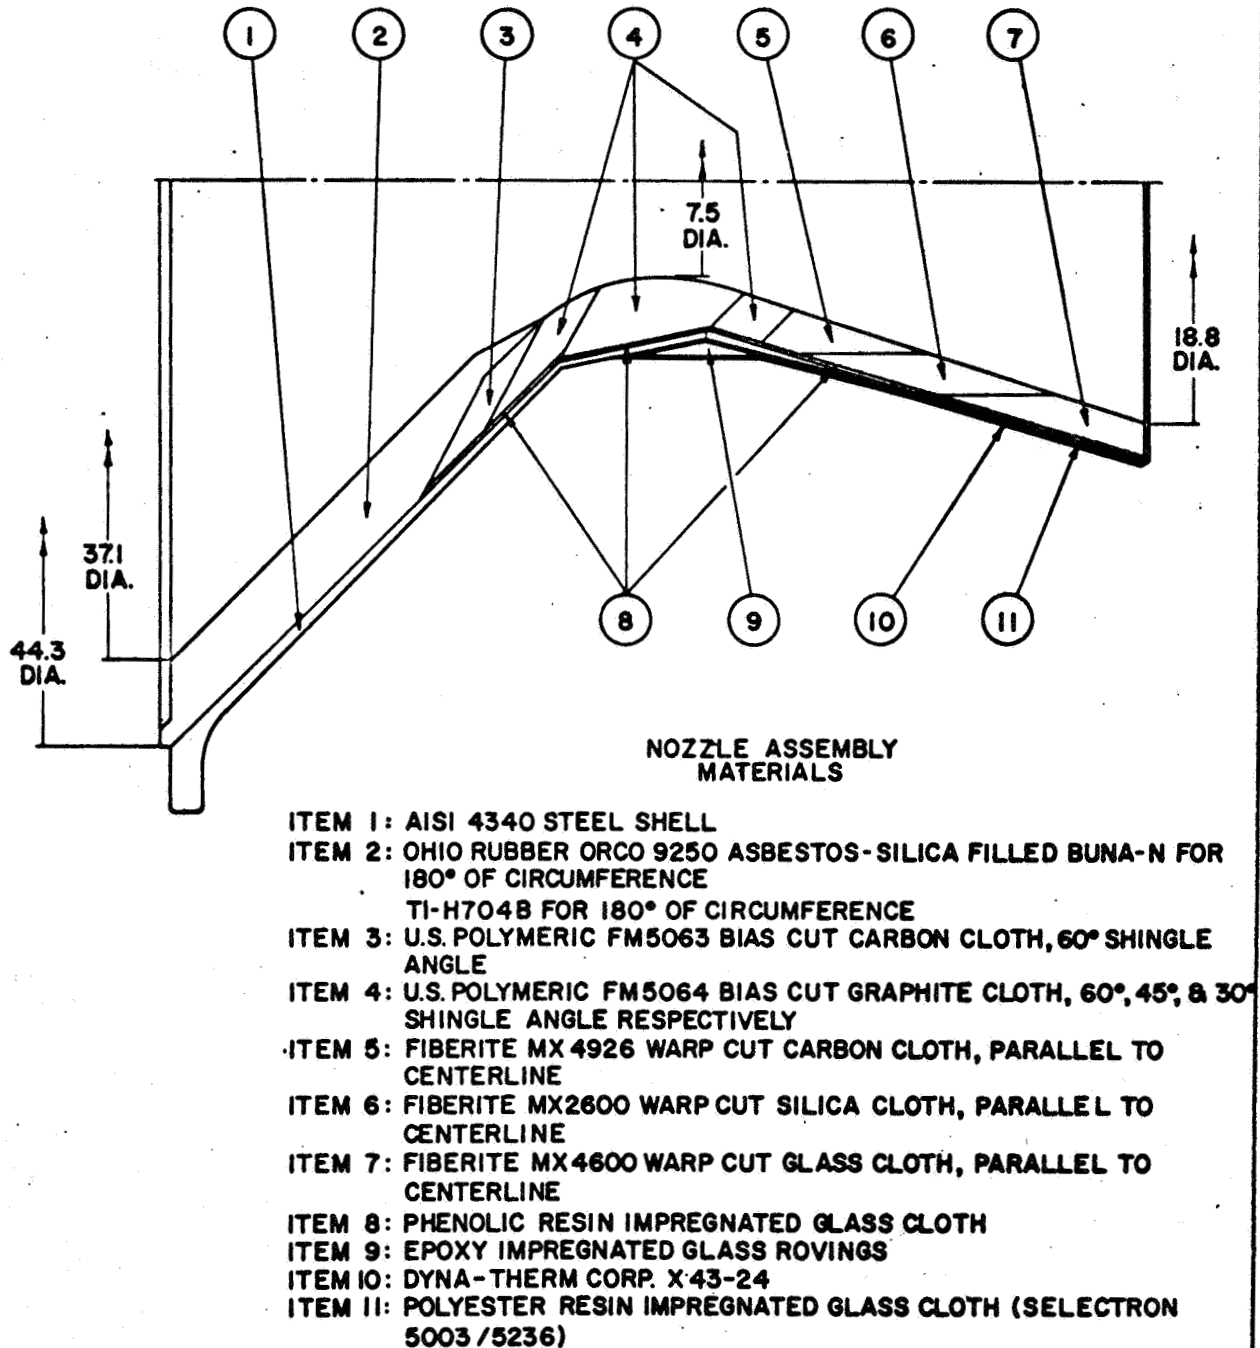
Nozzle Assembly Materials, 65-SS-3 Motor
